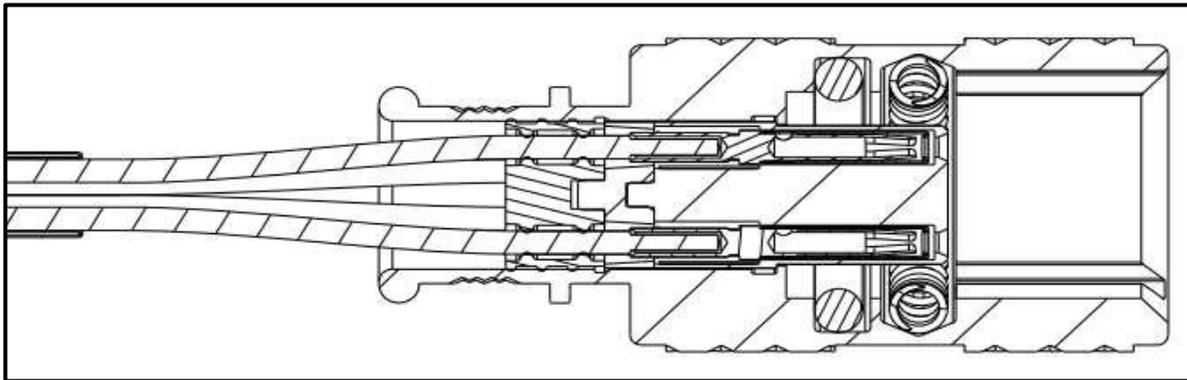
Cross Section of Receptacle Connector with Sockets Installed
